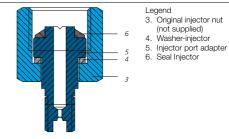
Image of the Injector showing the SilTite FingerTite injector adapter assembly.
